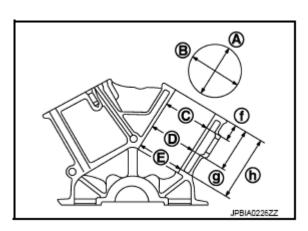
Identifying Piston To Cylinder Bore Clearances Courtesy of NISSAN NORTH AMERICA, INC.
